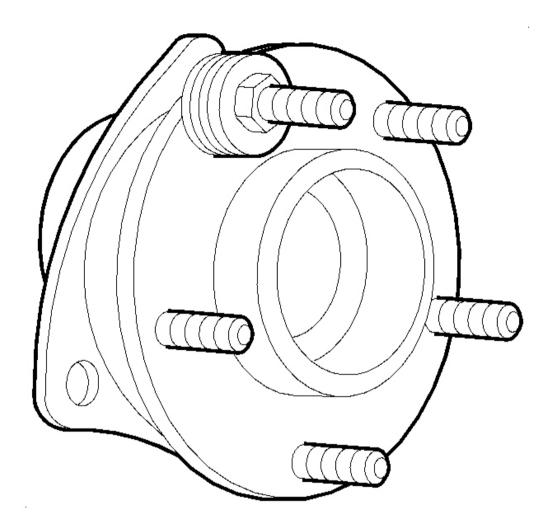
Hex Head Nut & Wheel Stud Courtesy of GENERAL MOTORS CORP.
